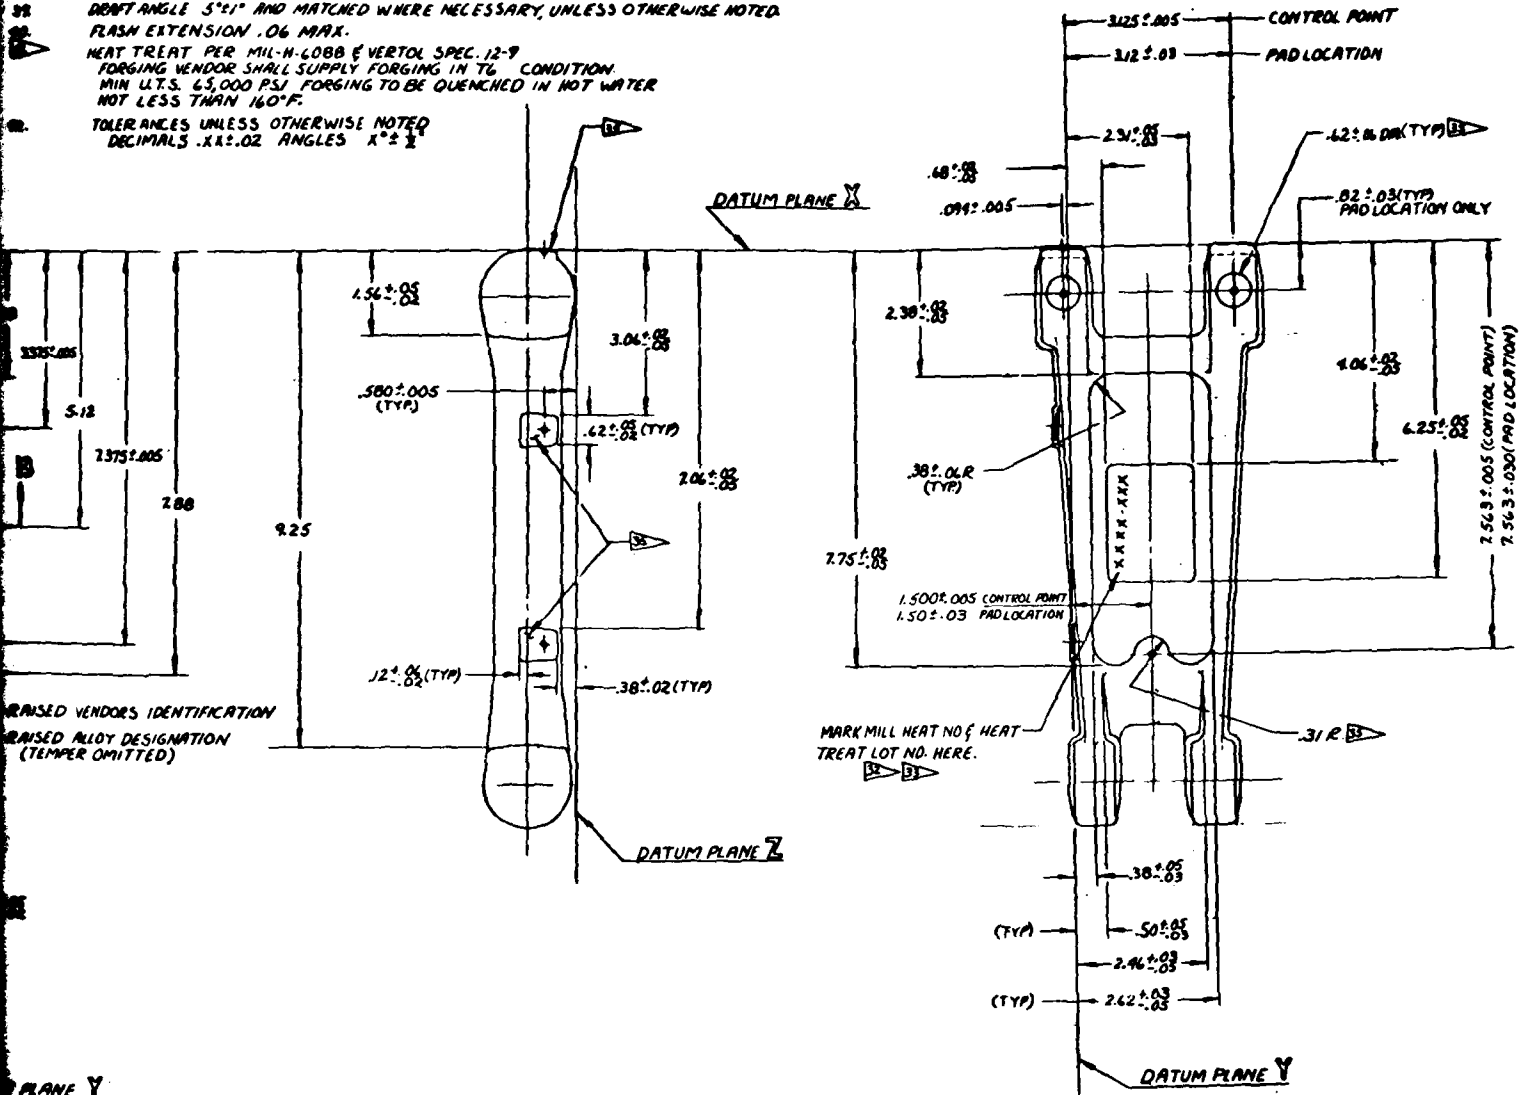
Drawing 107R3598, Drive Scissors Arm Assembly, Upper Rotor Controls (Sheet 1 of 3)
